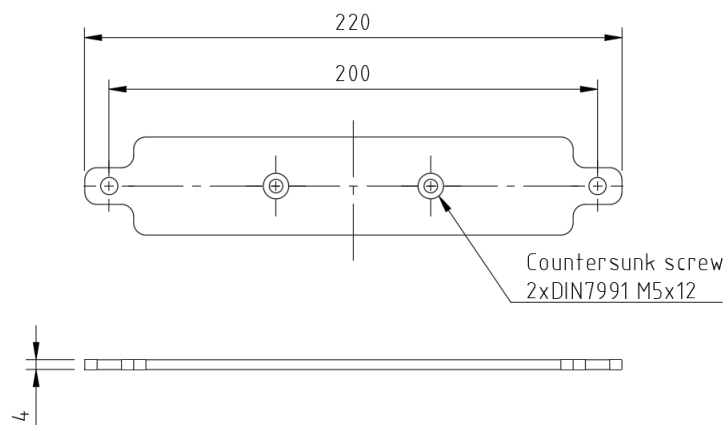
InduEye® TG Duo module standard mounting accessory - Dimensions in mm
